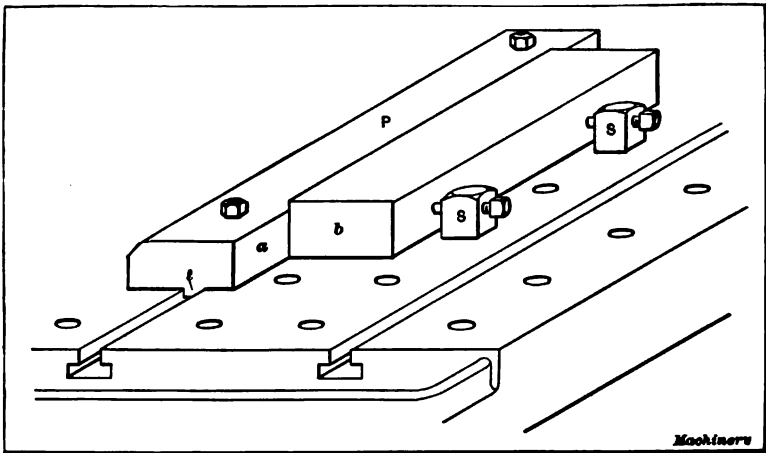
Work held between Stop-pins and Strip Bolted to Platen
